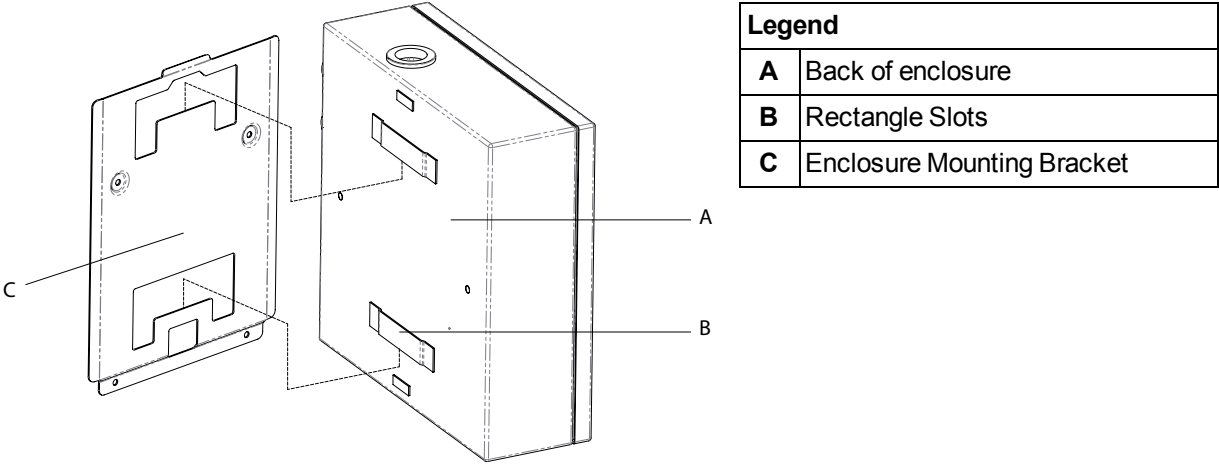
Mounting the enclosure onto the enclosure mounting bracket
